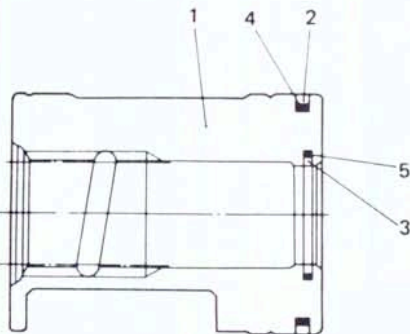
View of ball nut seals correctly installed. "O" ring must be behind Teflon rings.
